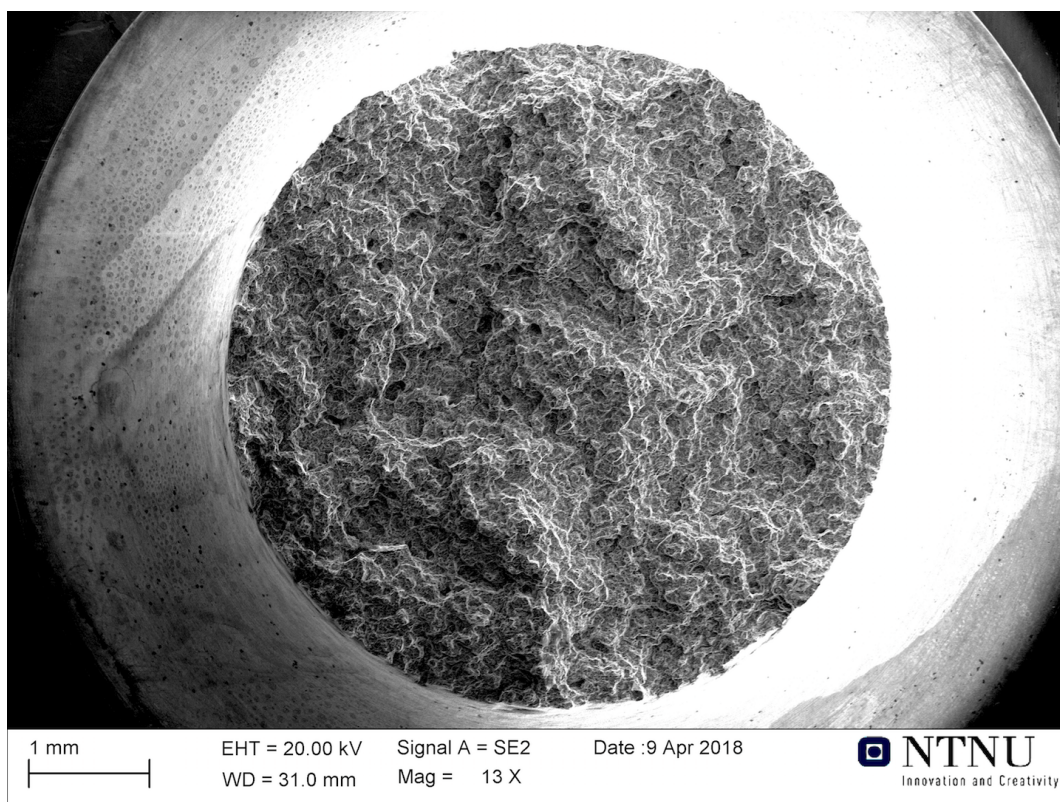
Overview of the fracture surface for the R2 notched specimen.
